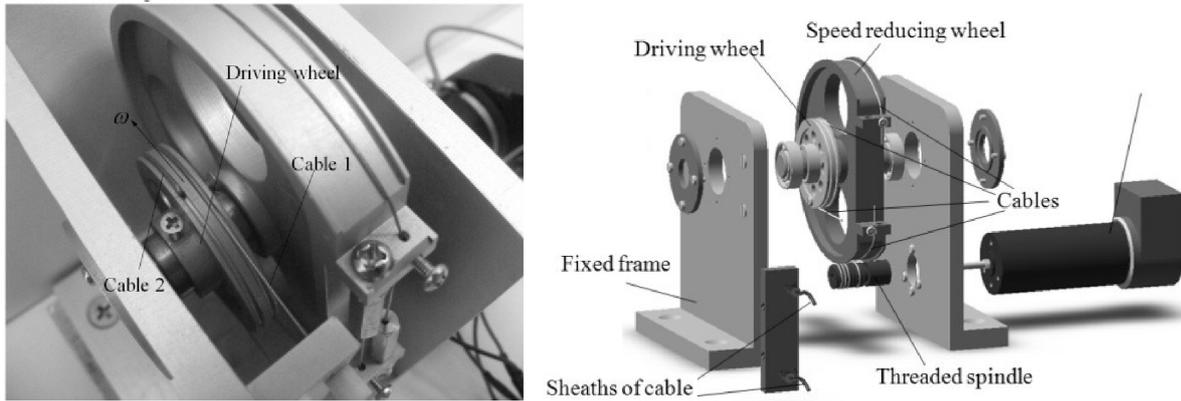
Actuator module of the Beihang University Hand (Taken from [12])
